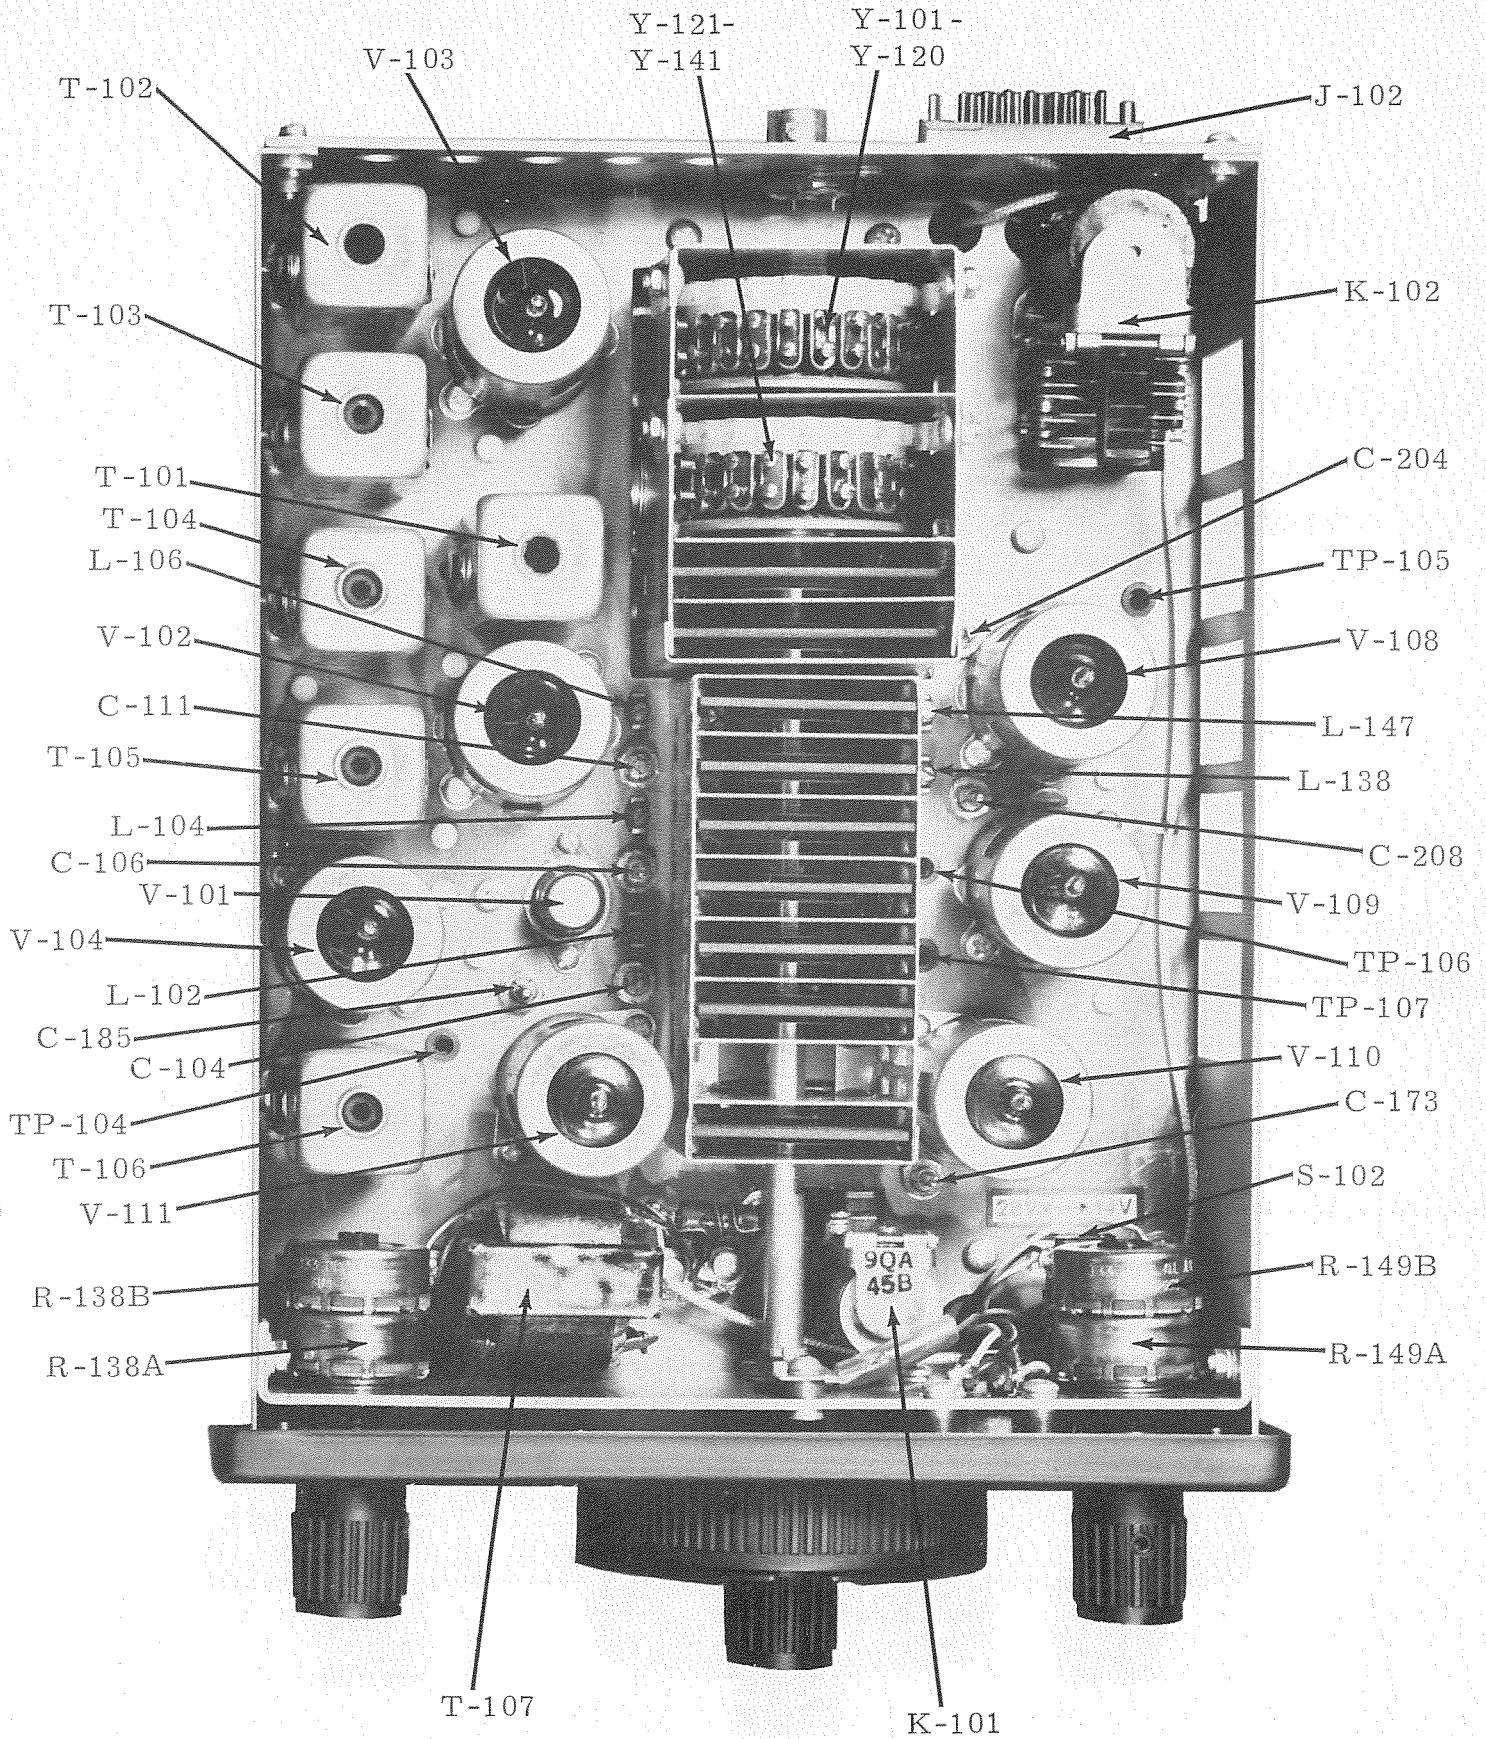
KY-95 CHASSIS TOP VIEW
